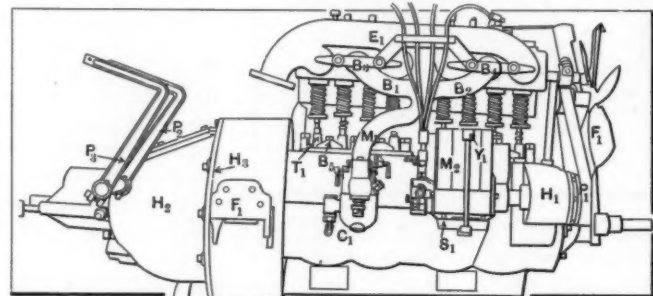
Right-hand side of the unit type of power plant showing the location of the magneto and carburetor
